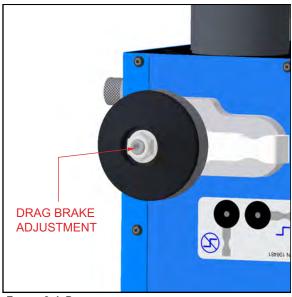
DRAG BRAKE ADJUSTMENT
